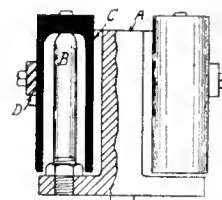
JIG FOR HOLDING SHELLS ON PLANER
